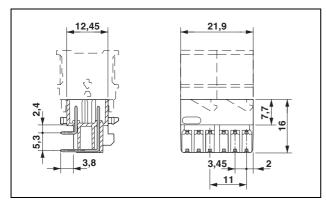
Dimensions of header HSCH 1,5-2U/12 9005
